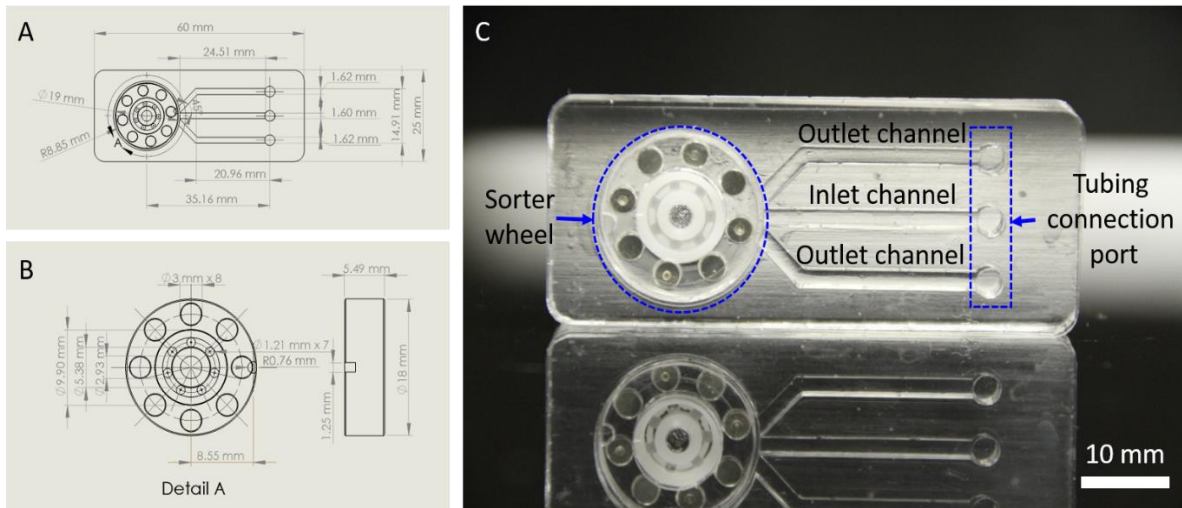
Overview of 3D chip-based in-flow embryo sorter (A) Detailed CAD drawing showing the details of the main loading, inlet and outlet channels. (B) Multiview projection of sorter wheel embedded with a polymer bearing and eight pairs of Neodymium magnets. (C) Fabricated biocompatible PMMA sorter chip that connects to tubing with an outer diameter of 3 mm. Live and dead embryos are separated via two outlet channels.
